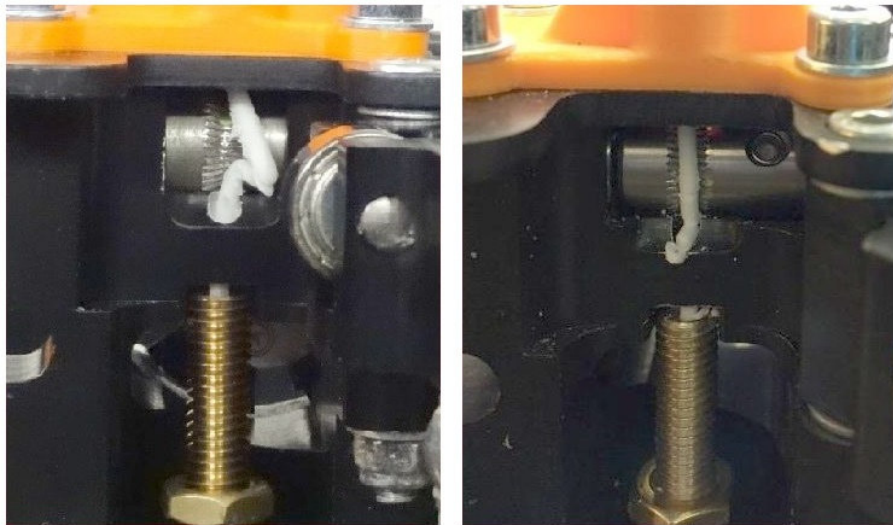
Print heads type I and type II. Motor driven gears are marked with black arrows.
